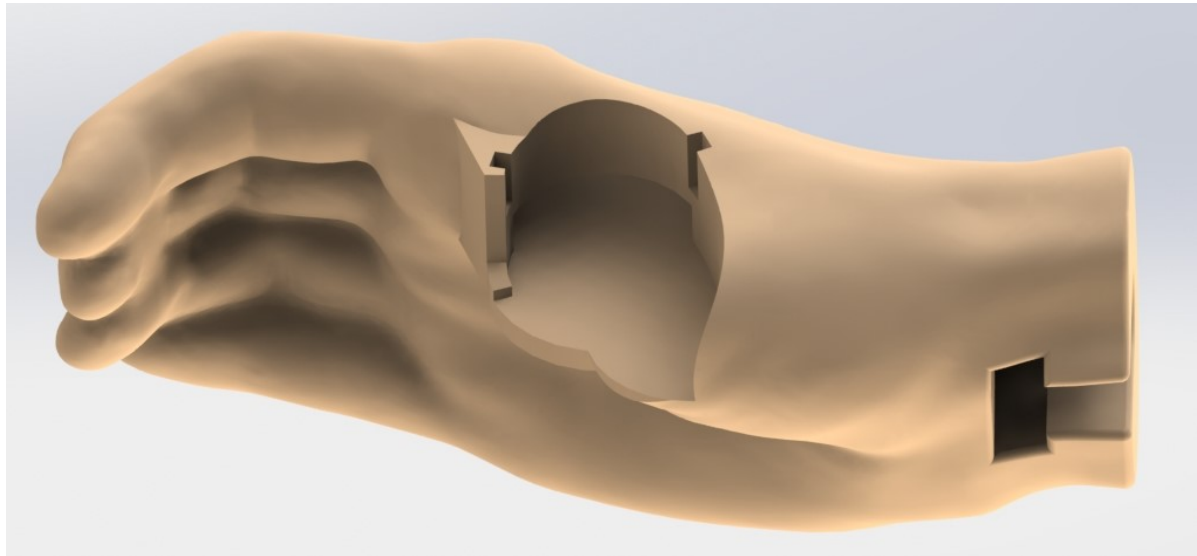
Rotational cavity; platform where the rotational parts are subjected and small housing to keep the parts in place.
